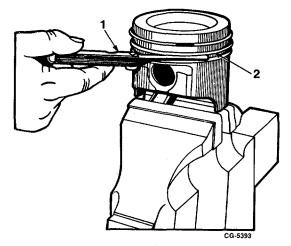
Checking Ring-to-Groove Side Clearance with Feeler Gauge
